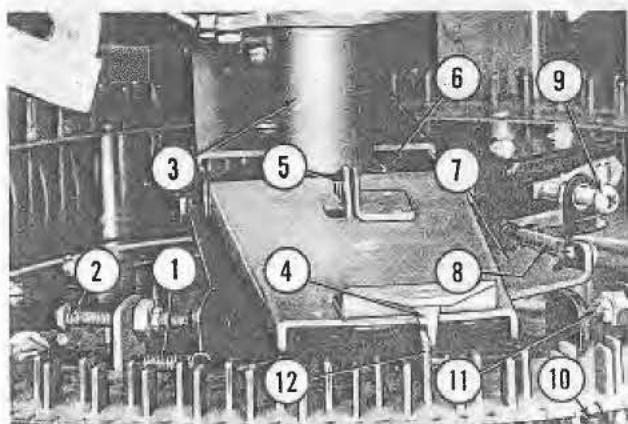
STOP SCREW ADJUSTMENT, SELECTOR CRANK
